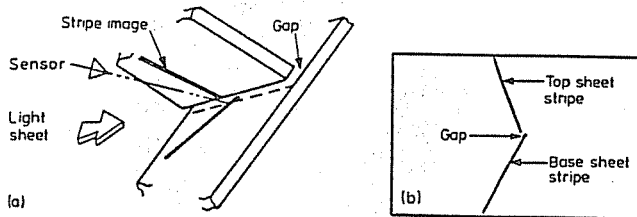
Welding of Two Perpendicular Plates with Meta Torch System a) Generating Stripe Image b) Analysis of the Image.
